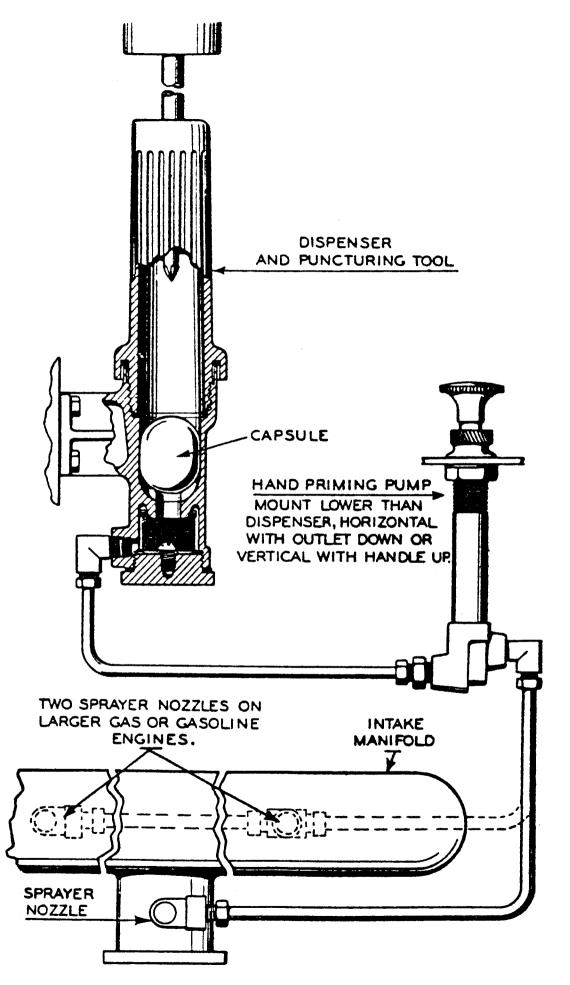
SECTION OF CHEVRON ETHER STARTER
